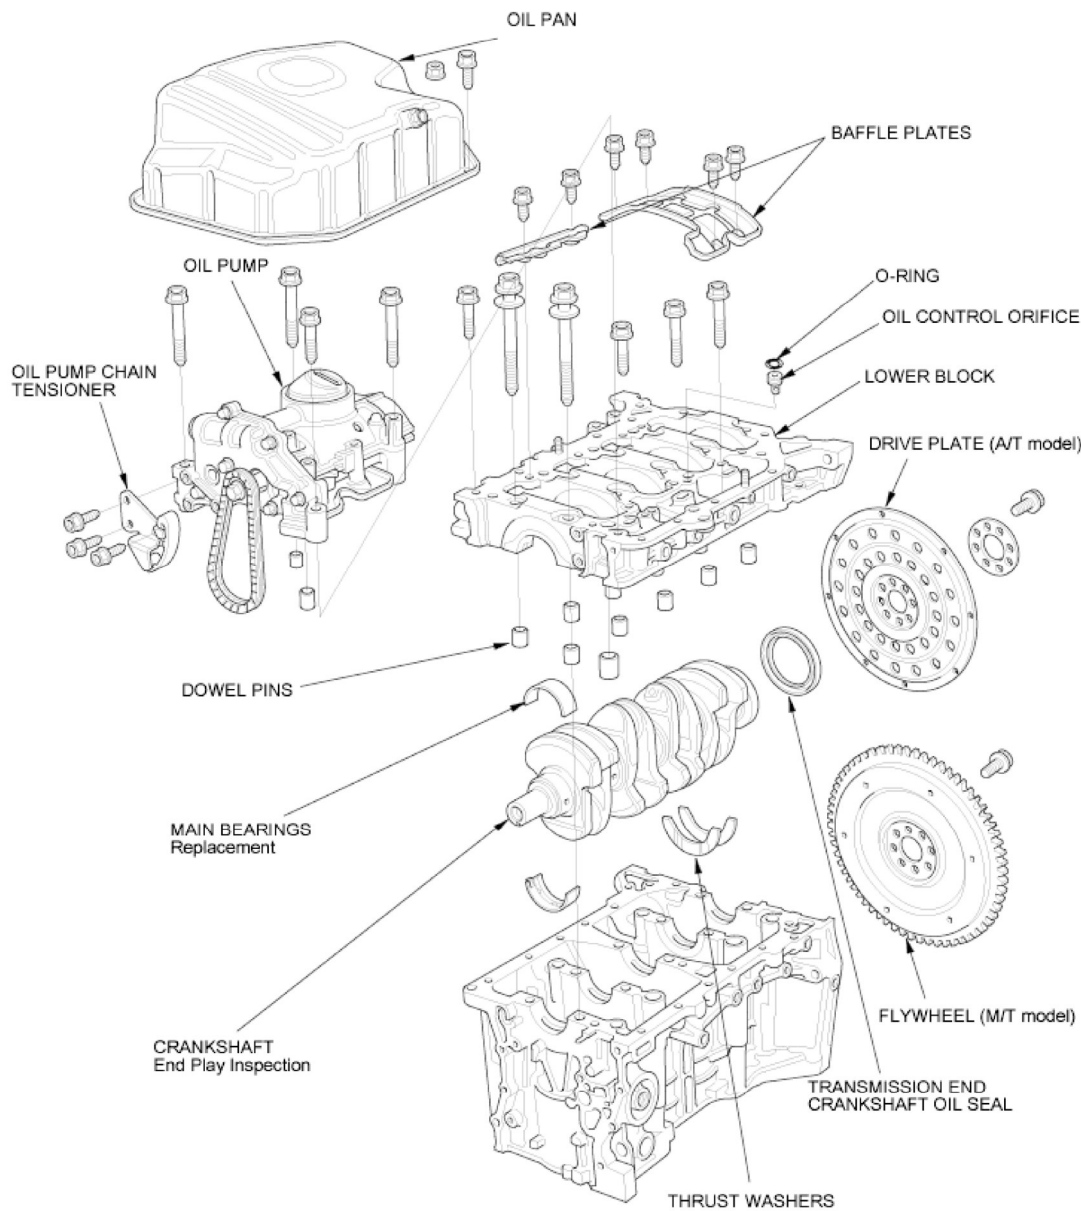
Identifying Engine Block Replacement Components (1 Of 2)
